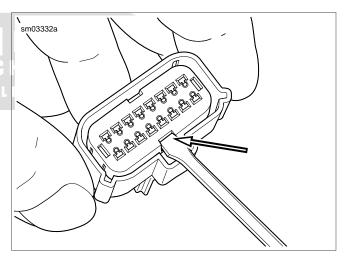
Secondary Lock Pry Slot (Socket Housing)
